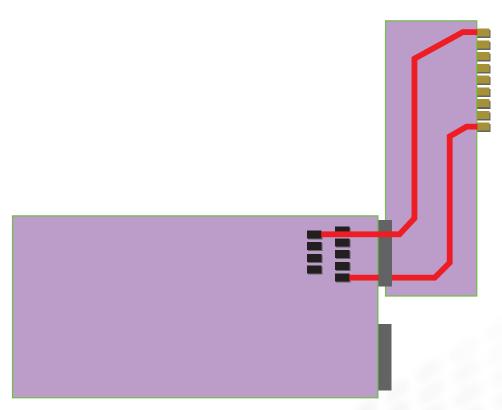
A typical mid-plane design showing long trace lengths and multiple connections.
